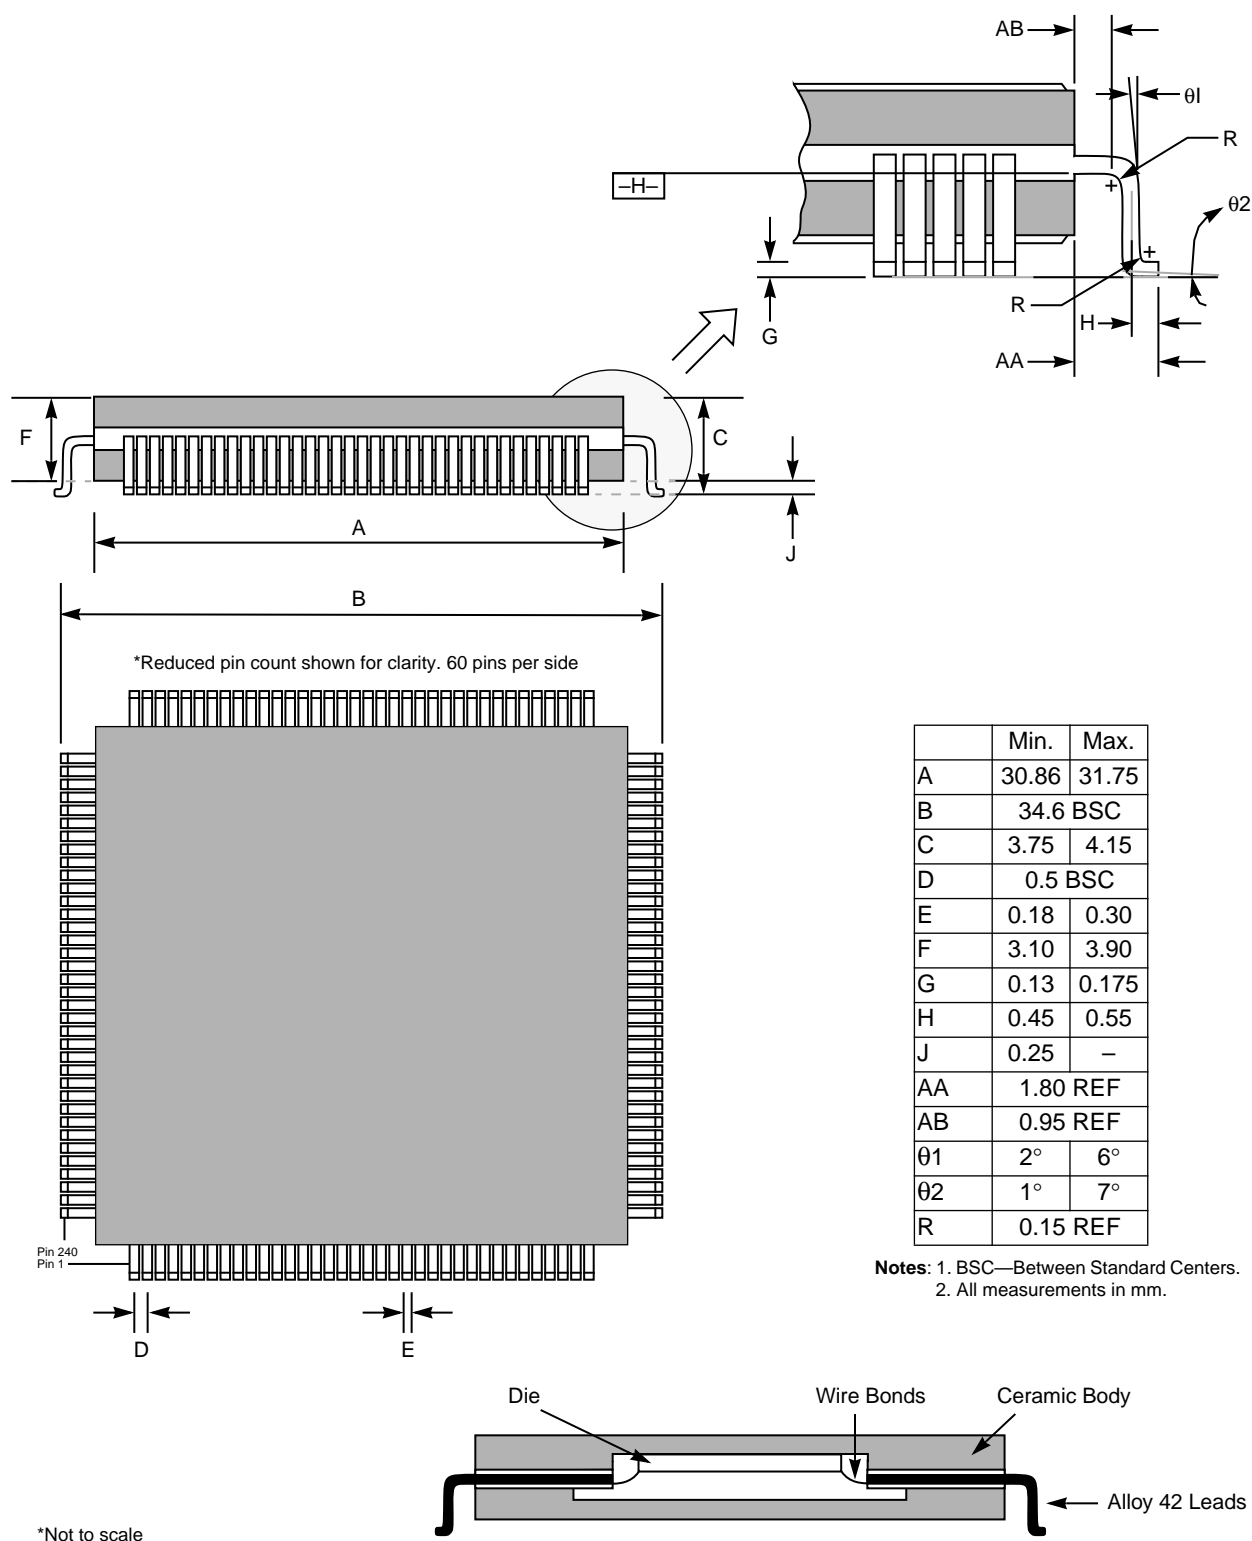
Mechanical Dimensions of the Motorola Wire-Bond CQFP Package
